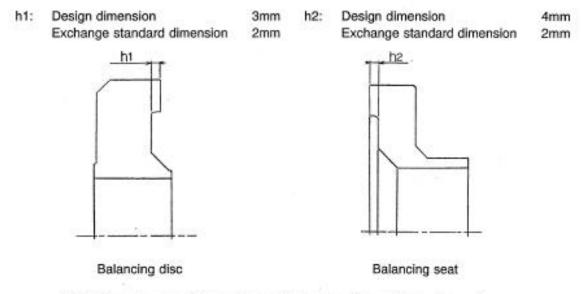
Dimension on sliding surfaces of balancing disc and balancing seat
